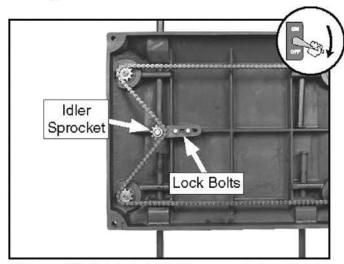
Table height idler sprocket and lock bolts (viewed from underneath the planer base).
